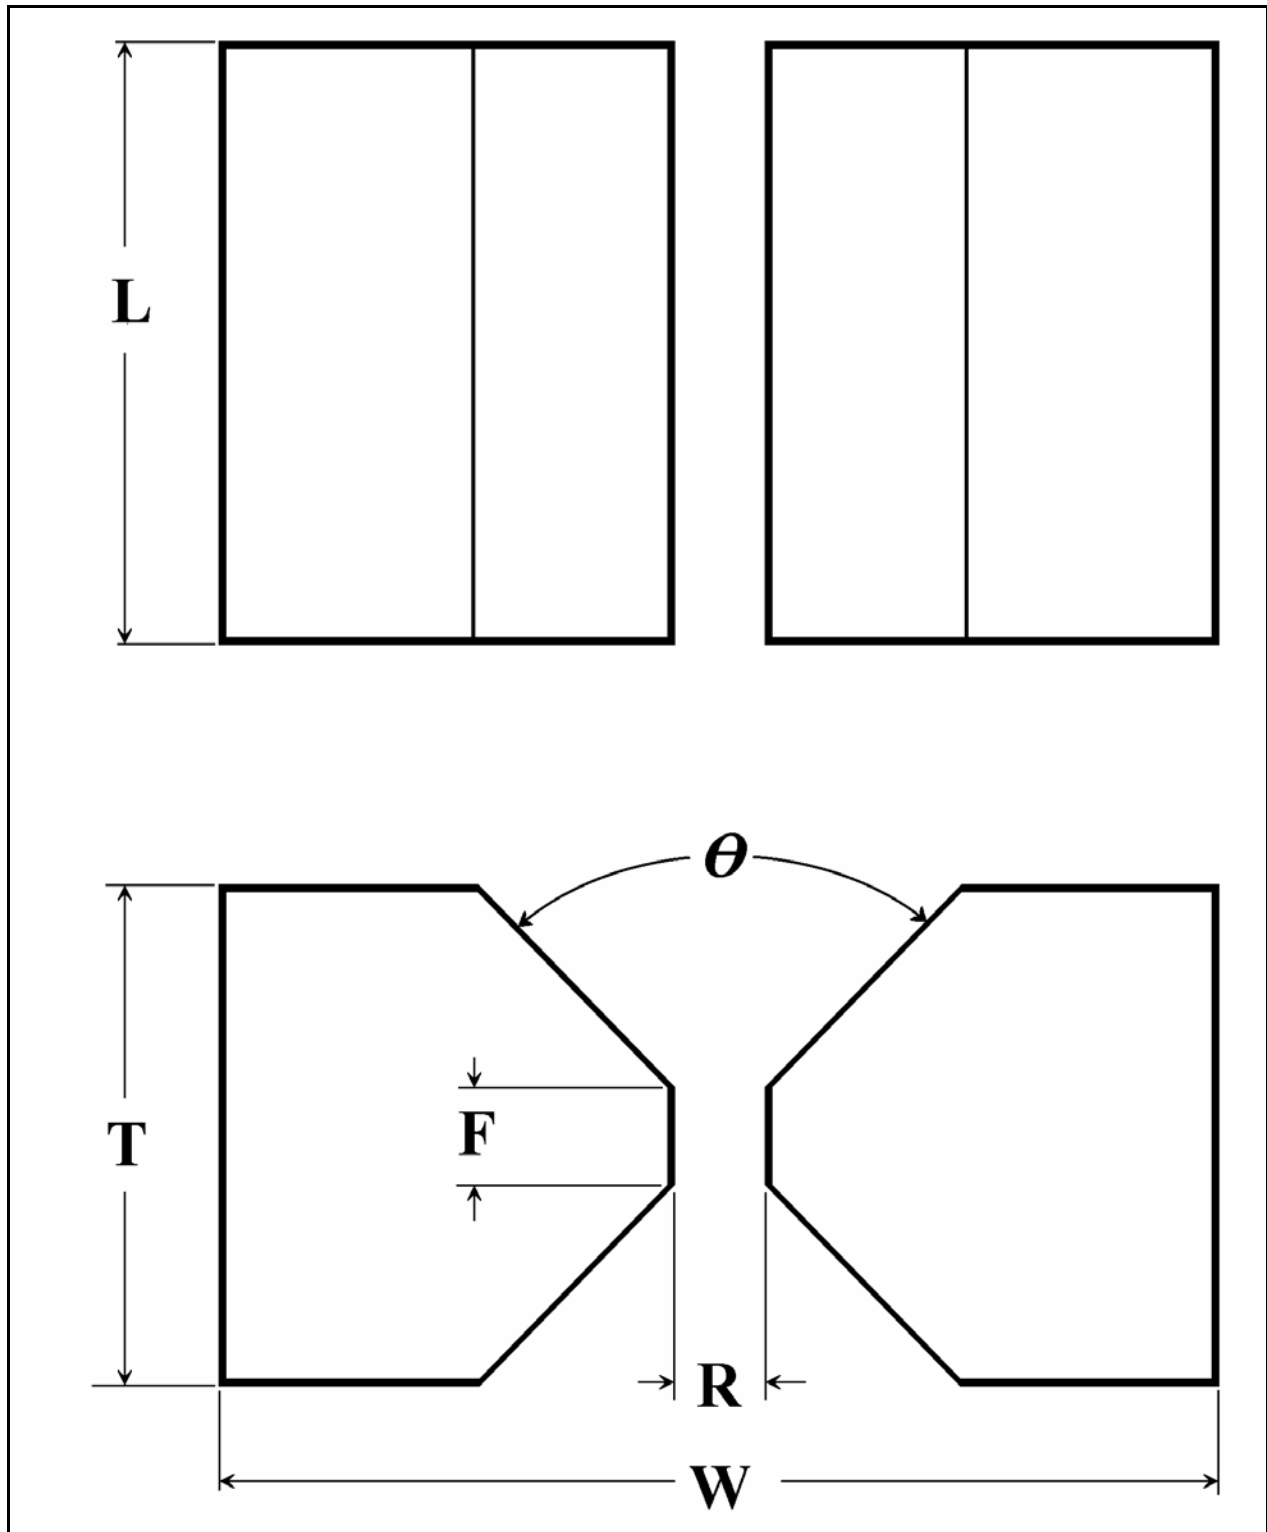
Double-V style weld joint configuration. 1/
